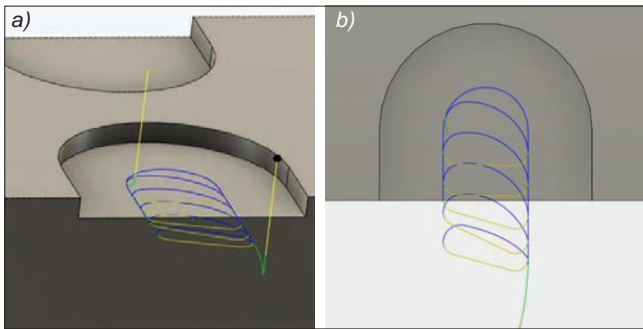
Tool path in the second machining strategy: a) isometric view, b) top view
